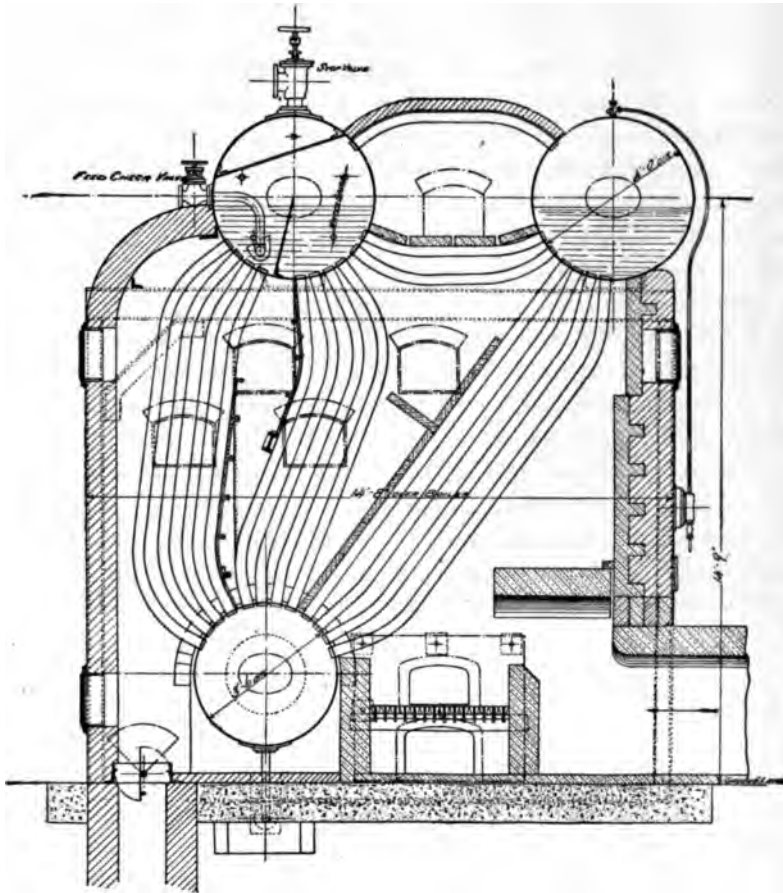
THREE-DRUM TYPE OF STIRLING WATER-TUBE BOILER.
